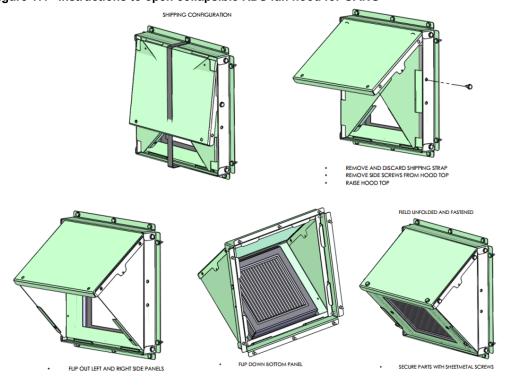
Instructions to open collapsible RDS fan hood for OANG
